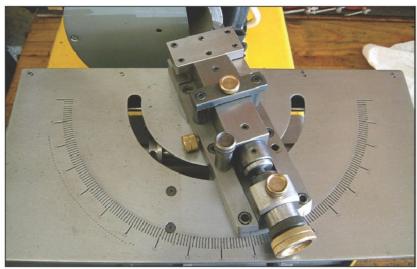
Alternative square tool holder allowing more effective use of the in-feed.
